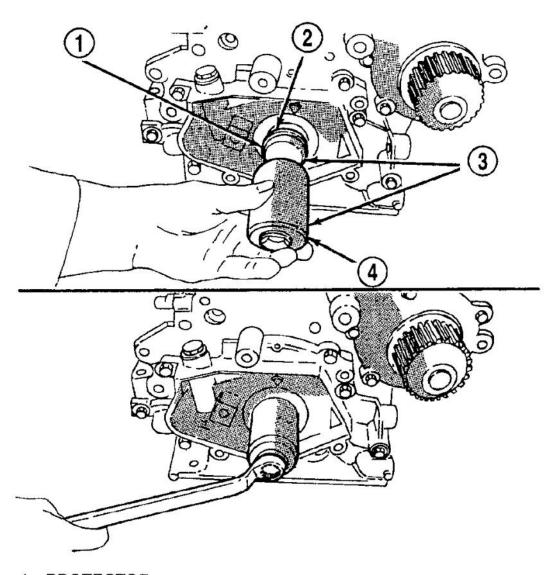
Removing Front Crankshaft Oil Seal Courtesy of DAIMLERCHRYSLER CORP.
